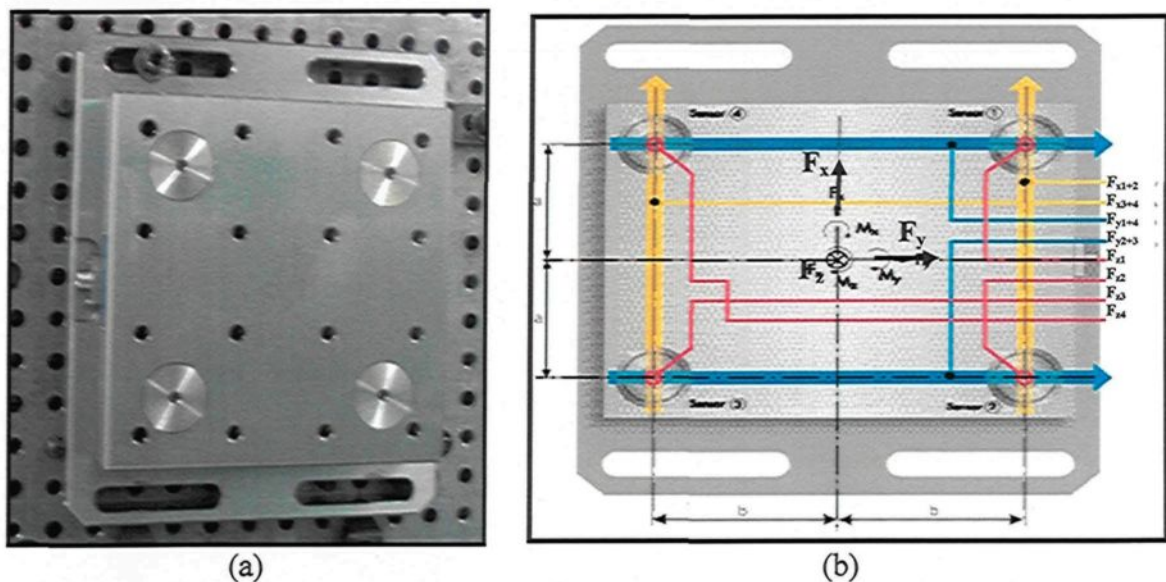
(a) Kistler dynamometer with four sensors used in this study; (b) illustration showing the measurement chains for the 6-component forces and moment measurements.
